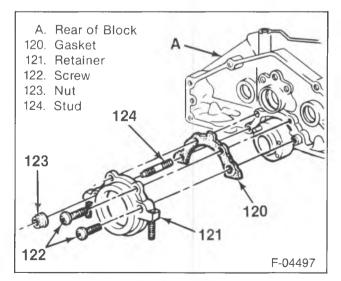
Rear Crankshaft Oil Seal Retainer (5.0L and 5.7L Engines)
